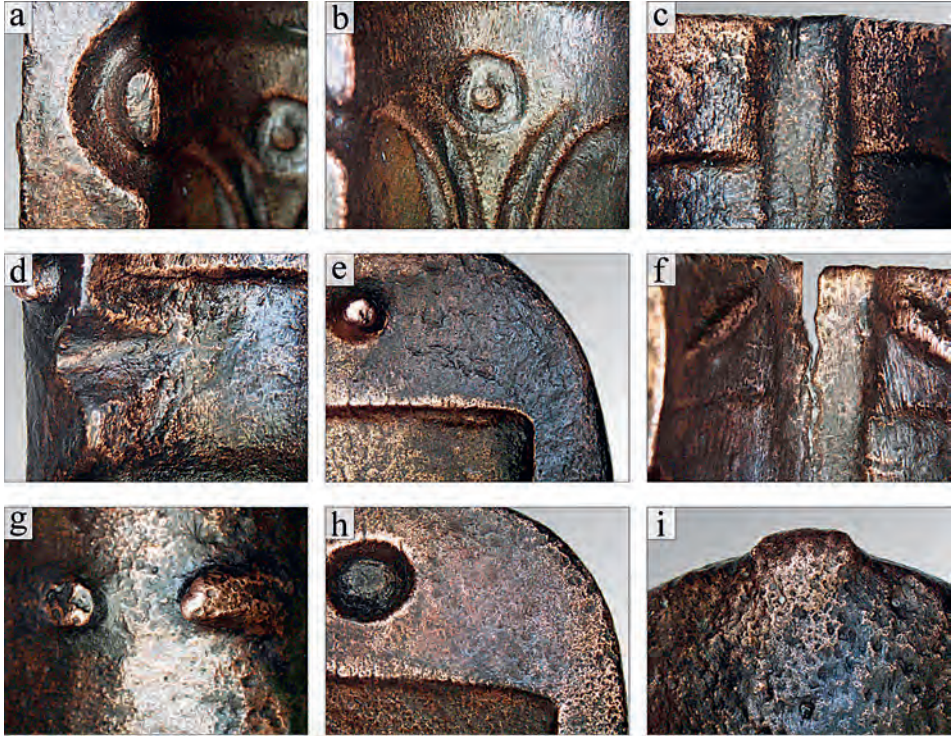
The macrostructures of the casting mould from Elgiszewo: a – loop negative; b – orante motif negative; c – feed channel; d – neck part with a cut-off line; e – peg; f – split; g – broken knob; h – peg hole; i – casting porosity.
